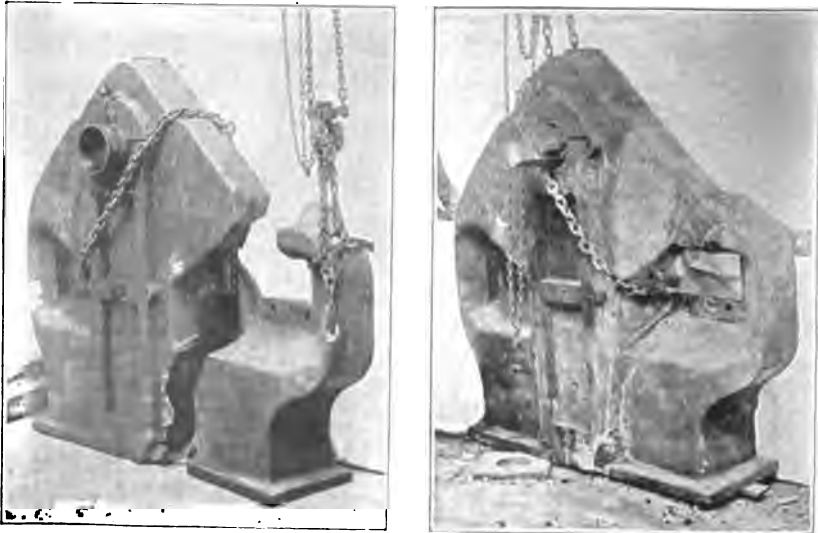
Immense Shear Casting Broken and Welded by the Gas Torch
